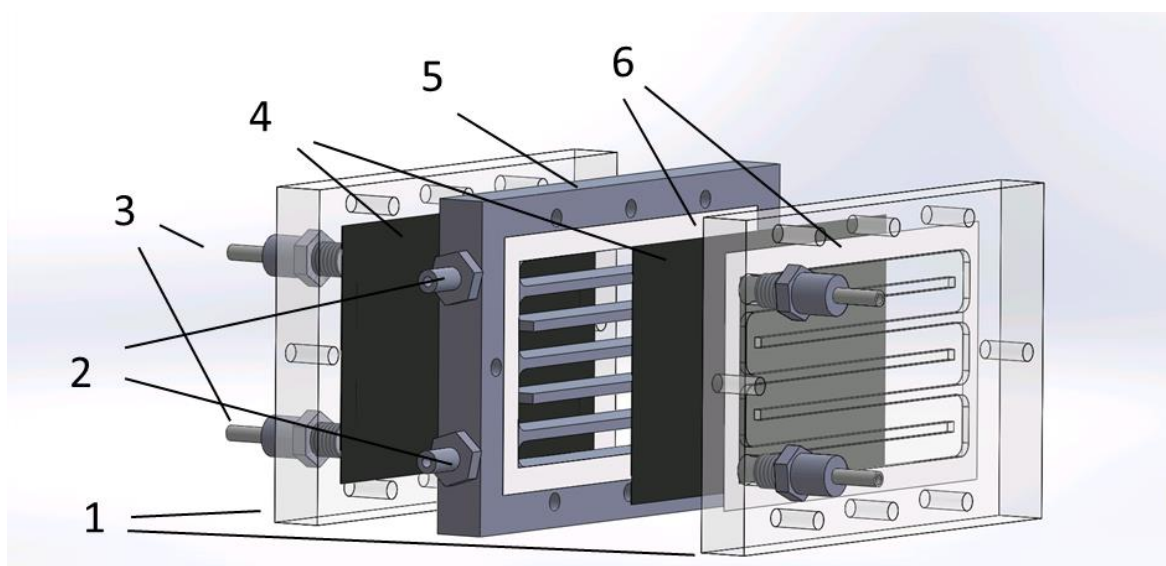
Schematic drawing of the plate heat exchanger for temperature control: (1) 20 mm PP-H heat exchanger side part, (2) G1/4" threaded screw-in 8 mm nozzle, (3) G1/4" threaded screw-in for DN04/06 tubings, (4) 0.3 mm carbon fiber composite (CFC) foil, (5) 20 mm PP-H heat exchanger mid part, and (6) epoxy bonding. Reproduced with permission from supporting information of reference.^[57]
